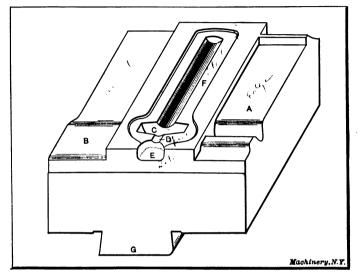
The Lower Die of a Pair of Drop-forging Dies
